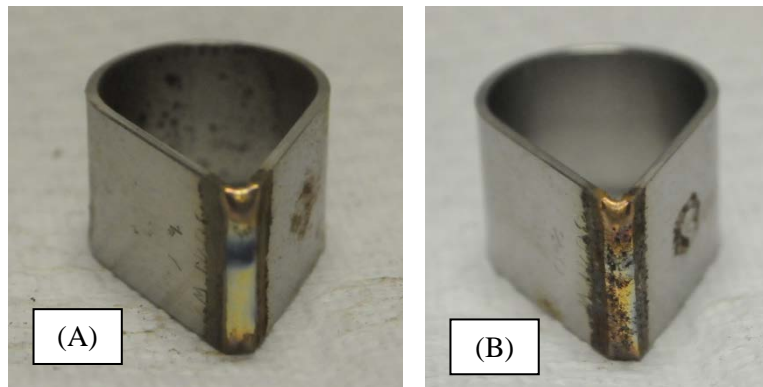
Photographs of TIG closure weld for teardrop coupons from Vessel C after 774-day exposure: (A) TD17, salt exposed and (B) TD20, vapor exposed
